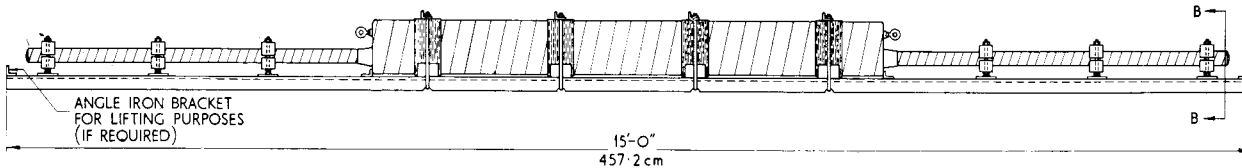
Showing Shipping cradle for 542 coil tunnel type case.
